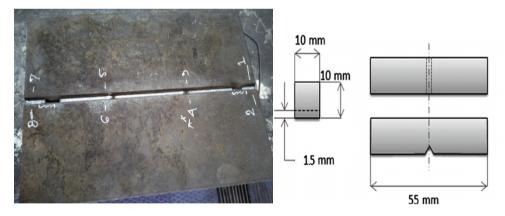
Welded plate, made of P460NL1 steel, and the geometry of the Charpy test specimens.
